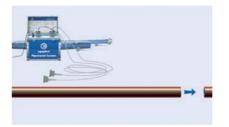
The pipe ends are prepared optimally for secure welding
